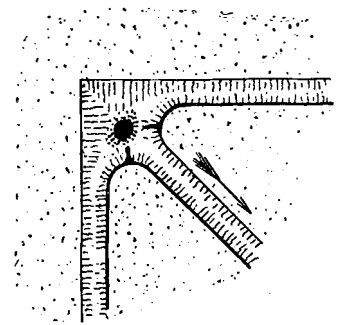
INJURIOUS THICKENING OF METAL, LIABLE TO PRODUCE A "DRAW" AND INCIPIENT FRACTURE.
